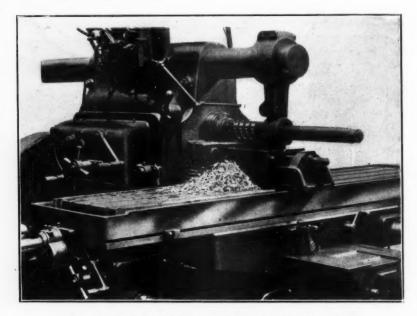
Helical Cutter at Work on Steel Test Pieces
